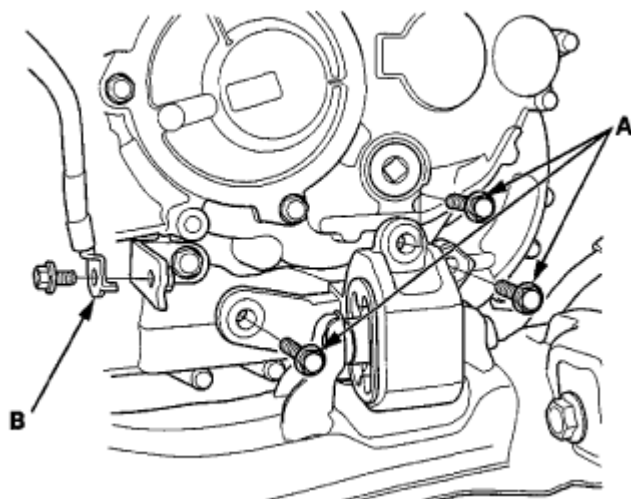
Identifying Ground Cable And Transmission Mount With Mounting Bolts (5-Speed A/T Model)
